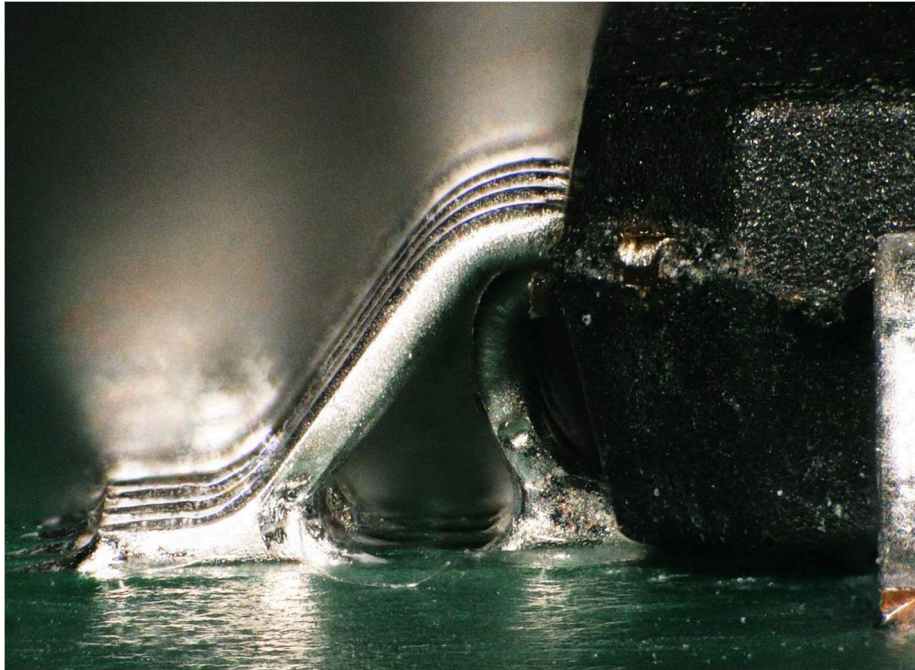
172 HDQFP soldered by reflowed onto PCB
